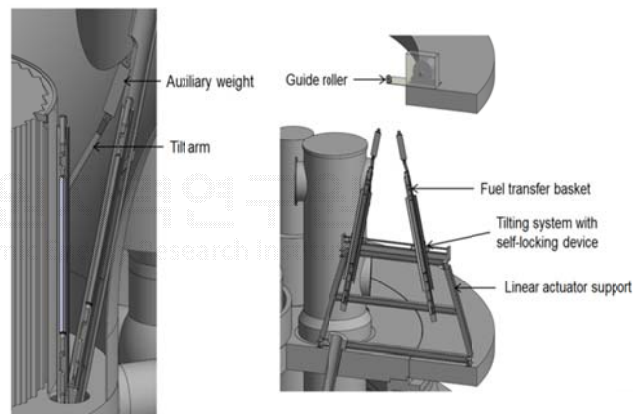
Lower and upper parts of A-frame type fuel transfer system with horizontal movement
